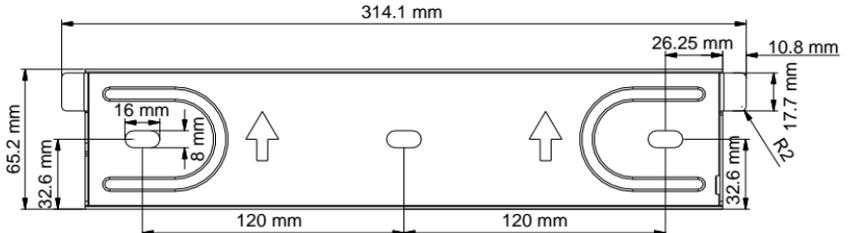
Dimensions of rear panel of R5-(3K-6K)-S2-15
